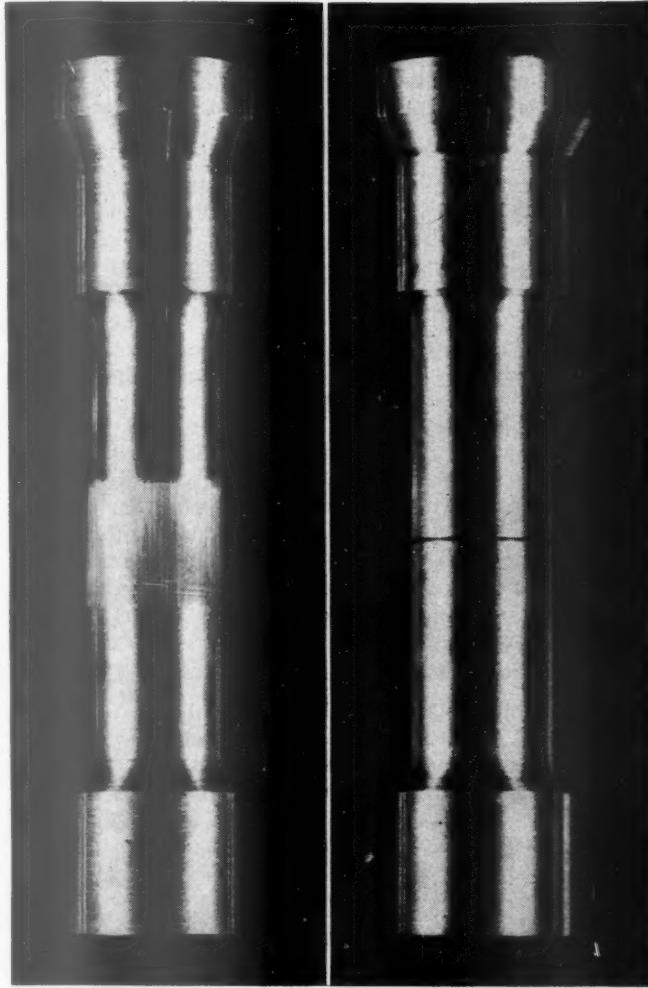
Concentric-ground (left) and eccentric-grooved (right) tubular specimens of boiler flange steel used in the tension tests
